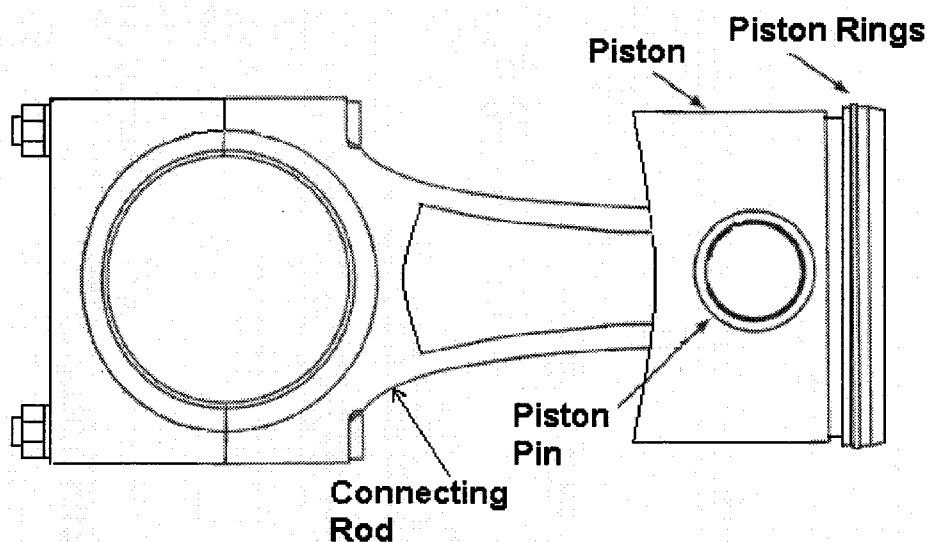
Conventional type of connecting rod of a reciprocating compressor.
